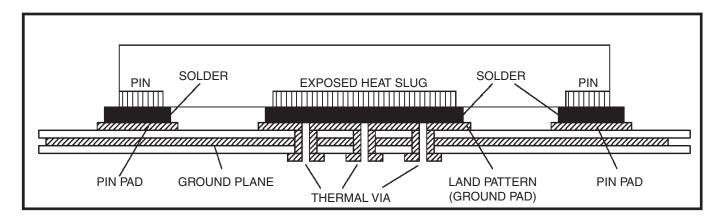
P.C. Assembly for Exposed Pad Thermal Release Path – Side View (drawing not to scale
